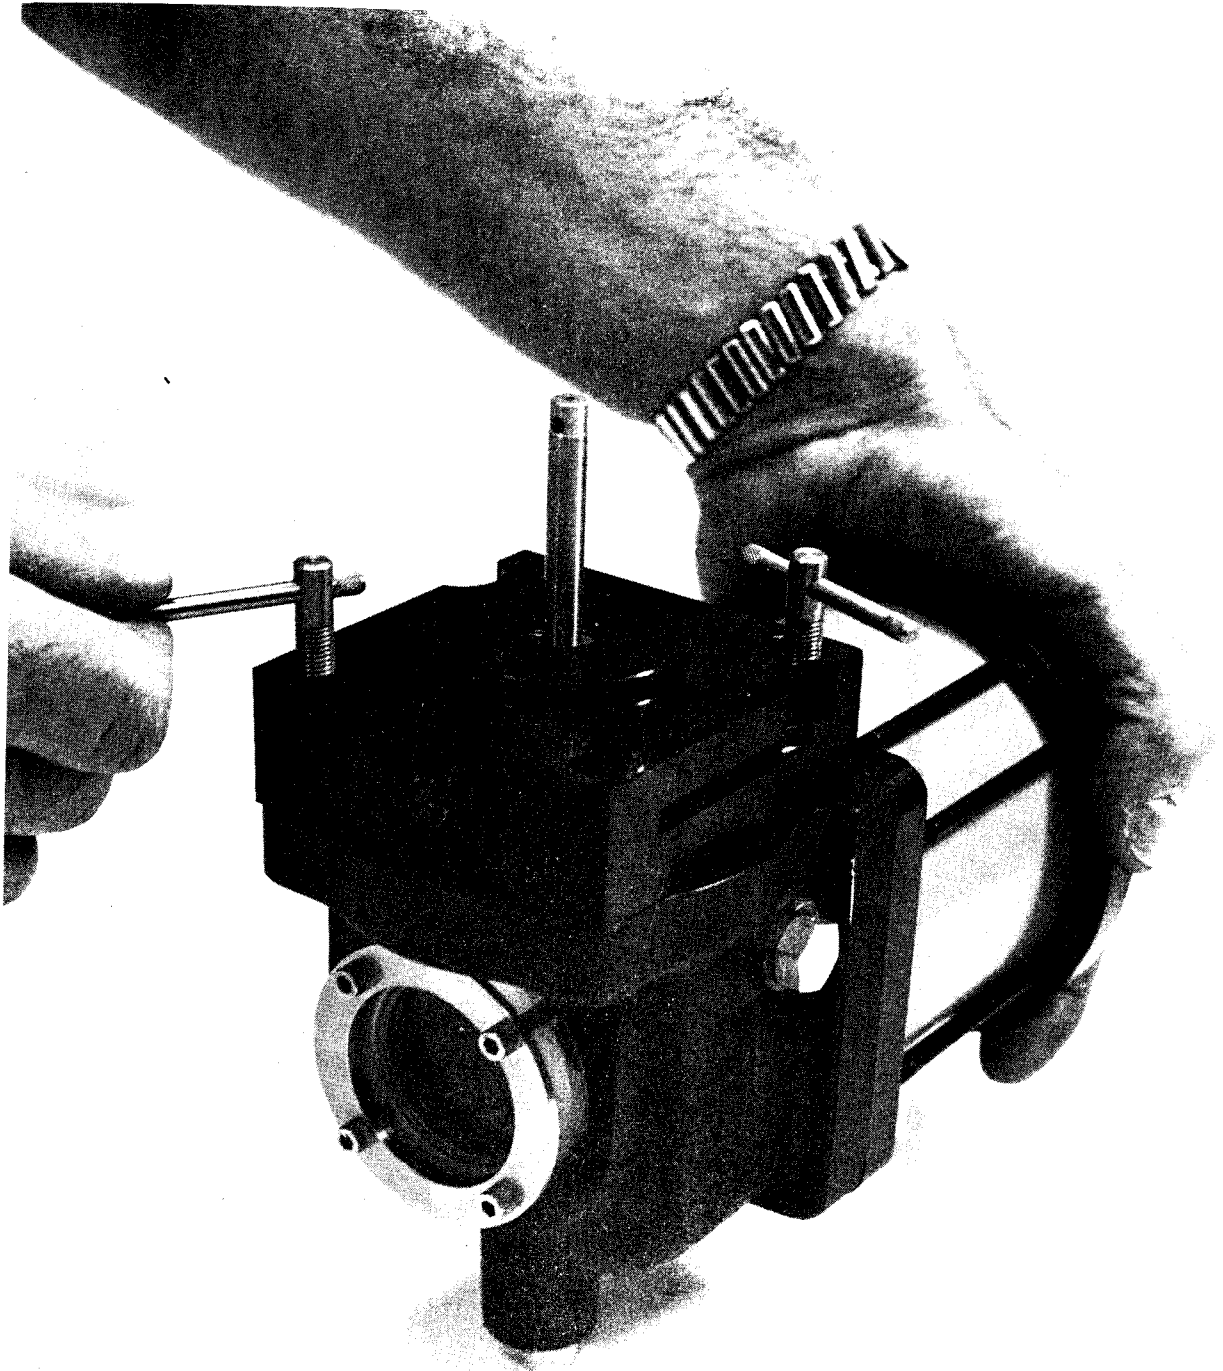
USE OF THE VALVE-PLATE JACKING SCREWS
